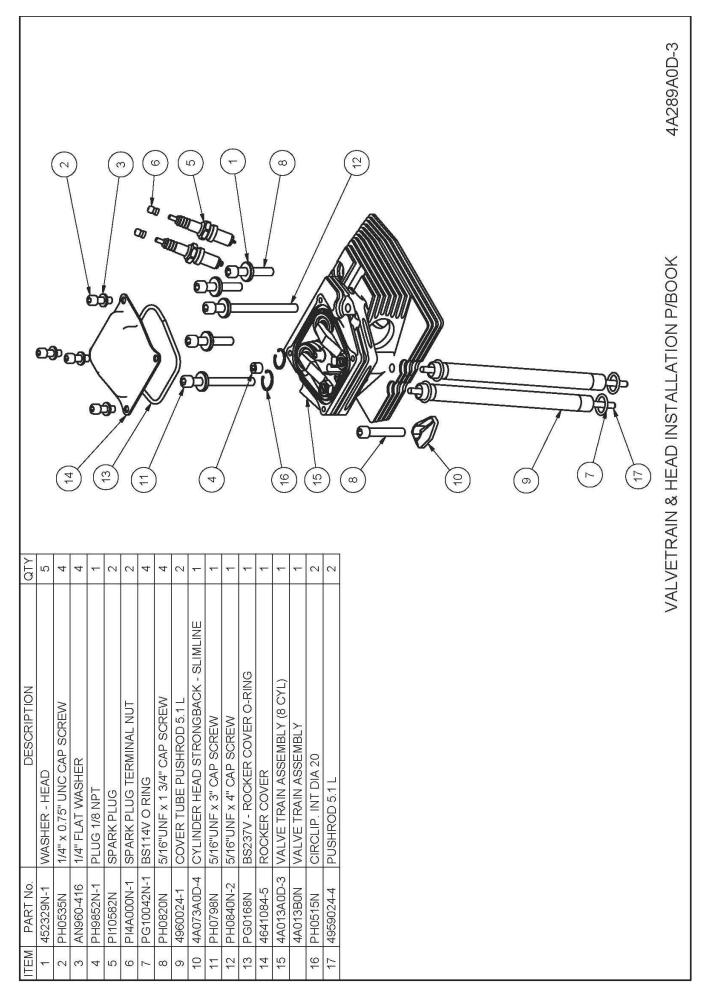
Head Mounting & Pushrod Assembly to S/N 33
